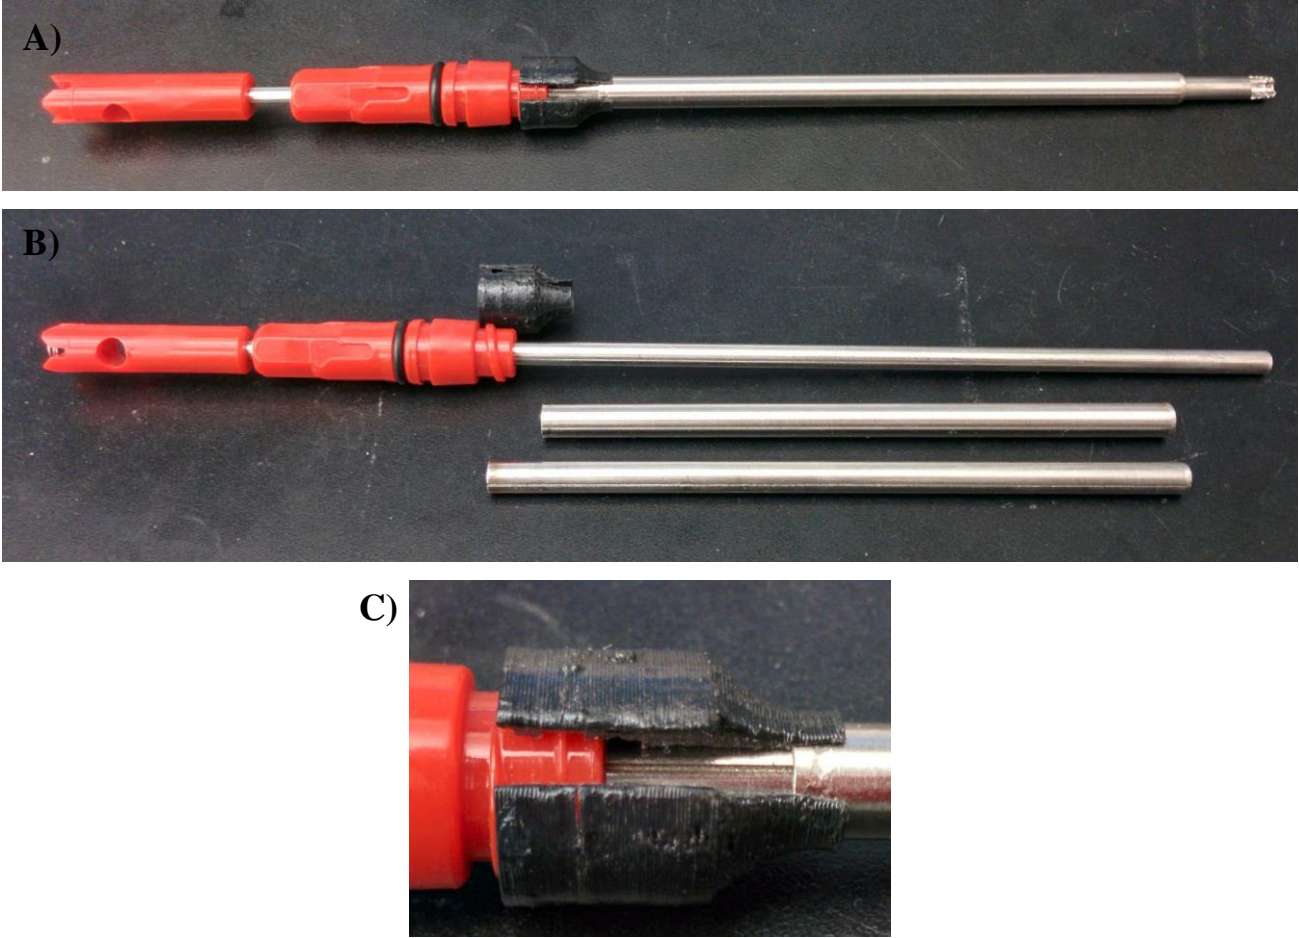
Shaver assembly (a) assembled; (b) disassembled; (c) plastic adapter.
